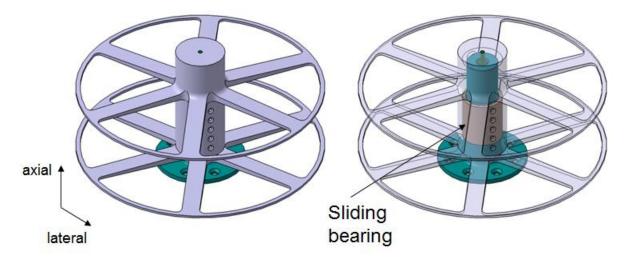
Auxiliary tether reel mechanism design with sliding bearing
